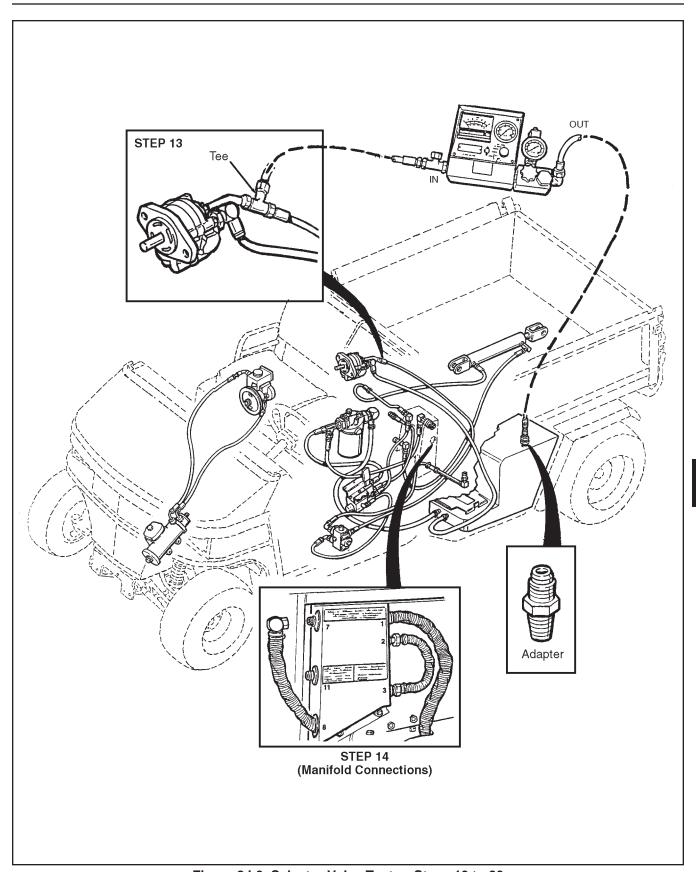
J-3. Selector Valve Test — Steps 13 to 20
